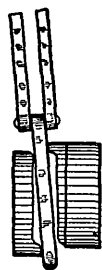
Contacts set with correct alignment. A flat .020" gauge spaces contacts .030" to .040"
